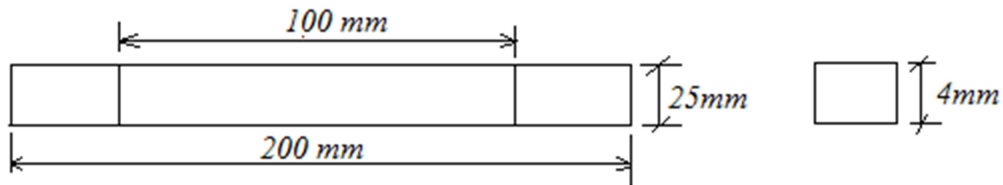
Standard Dimension of Specimen for Tensile Testing
